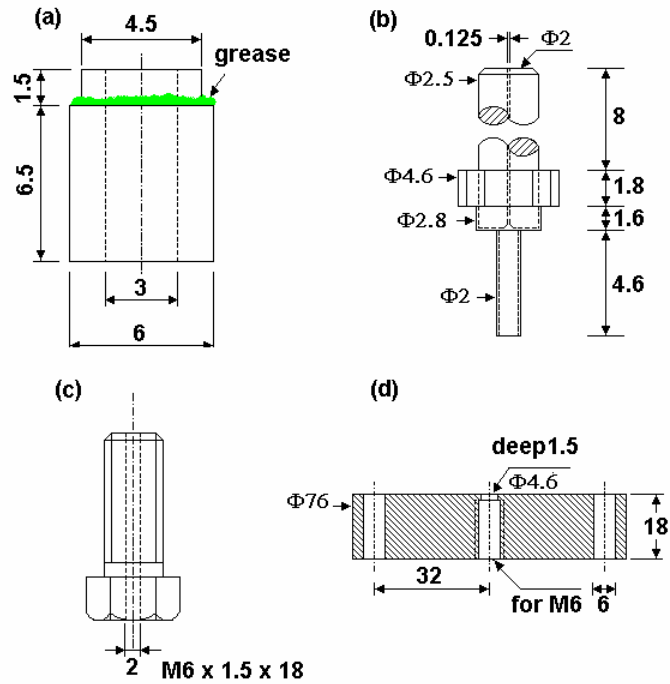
Sensor embedding components: a) mounting bush; b) zirconia ferrule; c) locking bolt; and d) end plate for shock tube. All dimensions are in mm.
